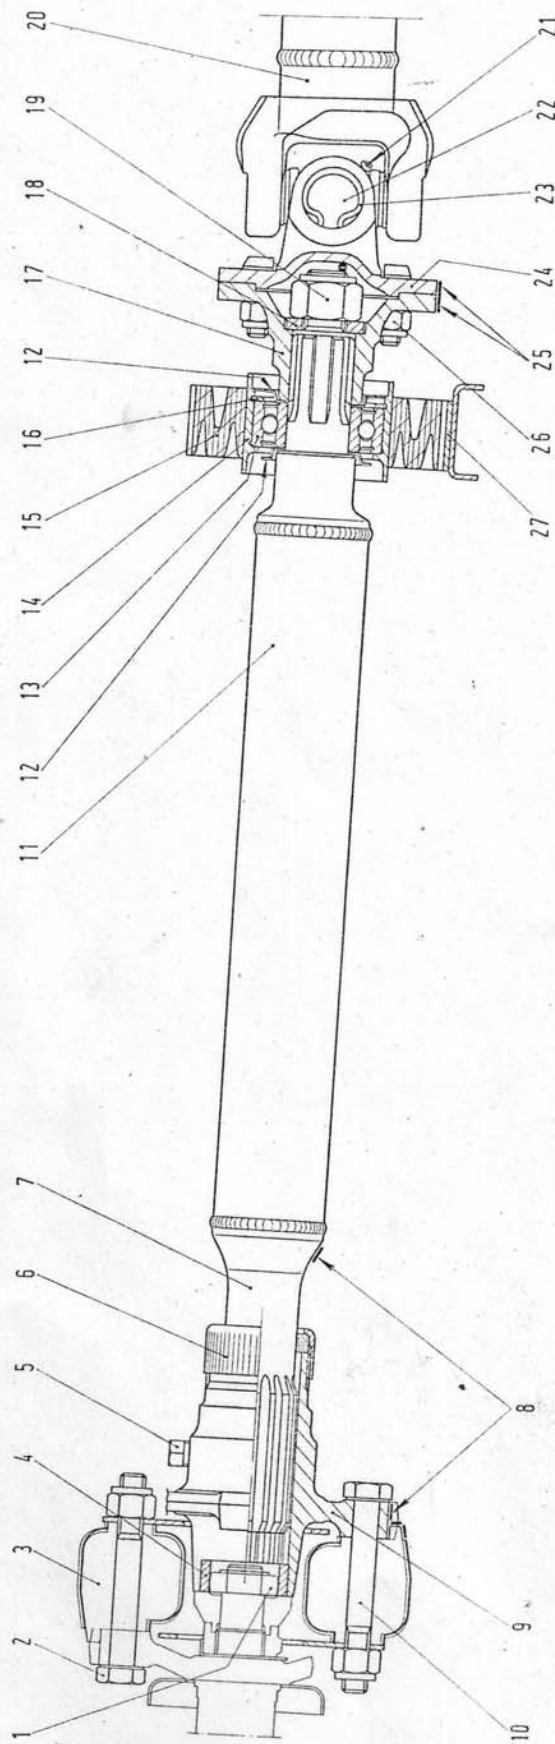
Longitudinal section through front prop shaft joints and pillow block.
